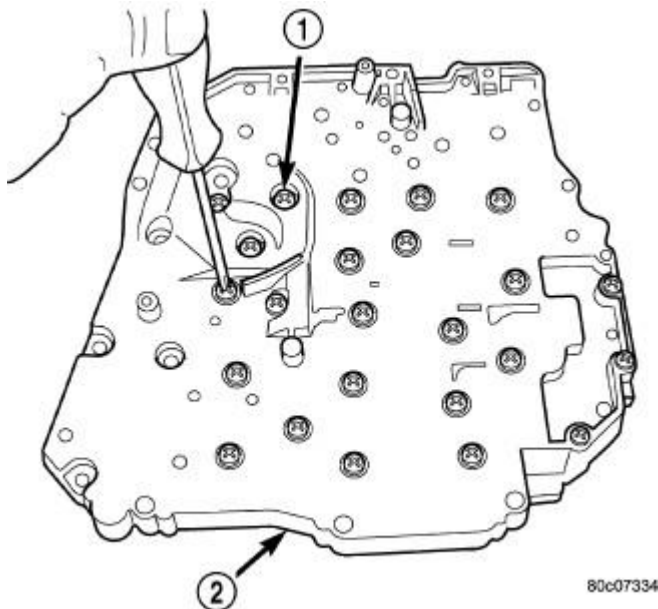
Remove/Install Transfer Plate-at-Valve Body Screws
